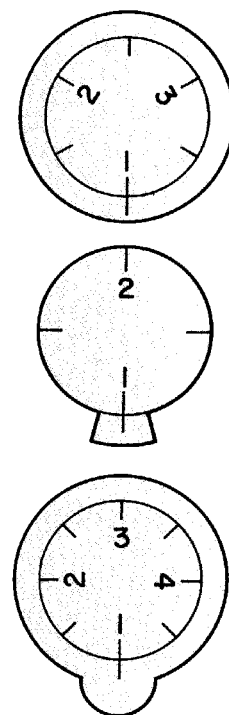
Thread dials. A—Thread dial for cutting inch-based threads. B—Dial used for cutting either inch-based or metric-based threads. The housing contains a series of gears, with gear selection depending upon threads being cut. (Clausing Industrial, Inc.)
